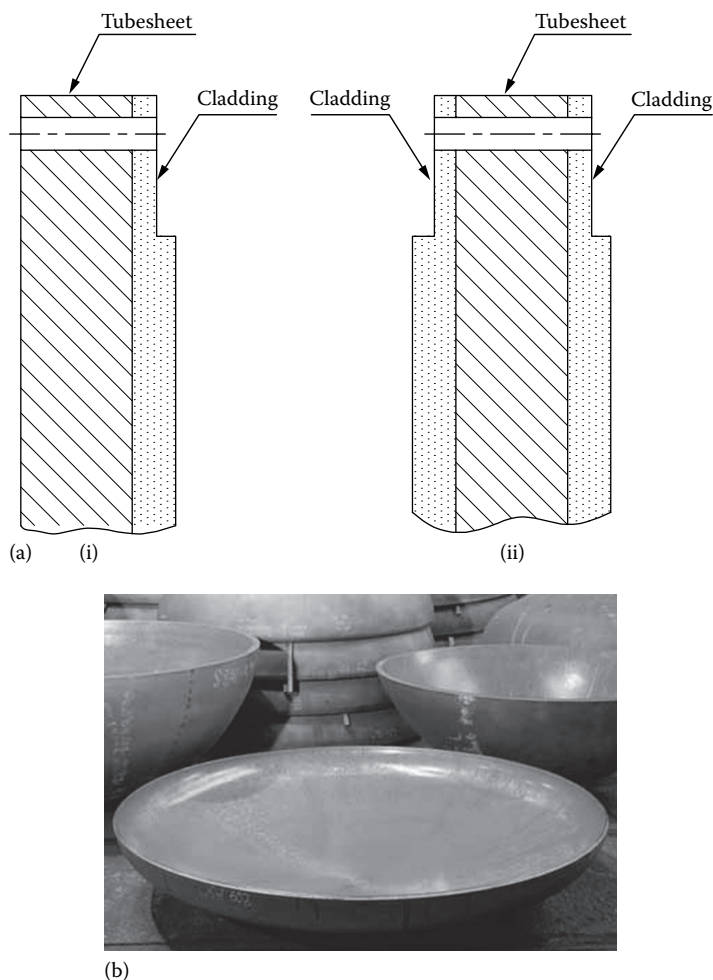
Cladded heat exchanger component. (a) Tubesheet and (b) heat exchanger heads. (Courtesy of Voestalpine Grobblech GmbH, Linz, Austria.)
